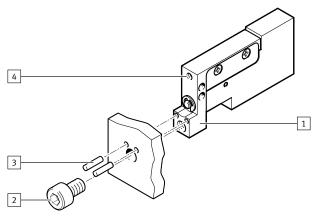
Mounting on the slide, DGSC-6-10-PP as an example
